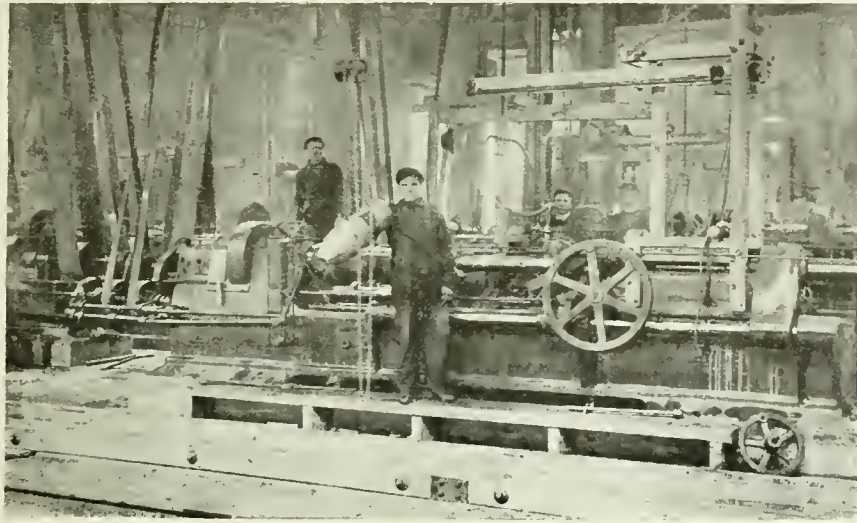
"A.M.C." LATHES ON ROUGH AND FINISH BORING. ILLUSTRATION SHOWS SHELL BEING REMOVED FROM LATHE.
